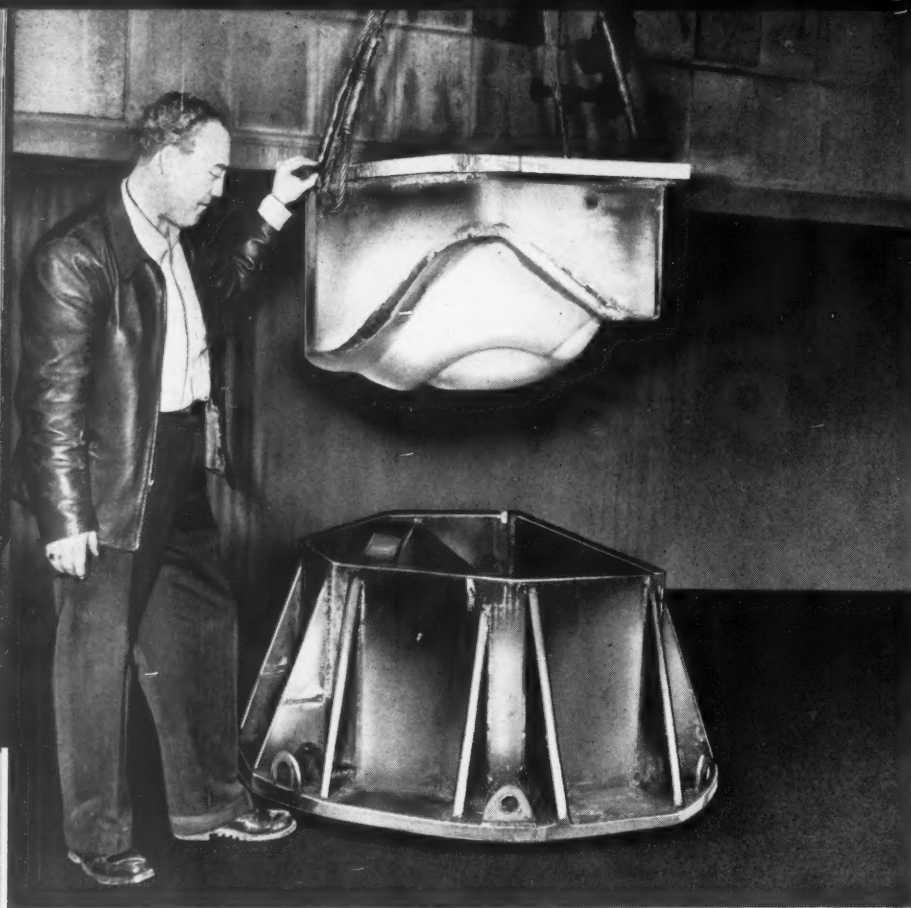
Plastic drop-hammer die employed to produce the fairing shown in Fig. 11
